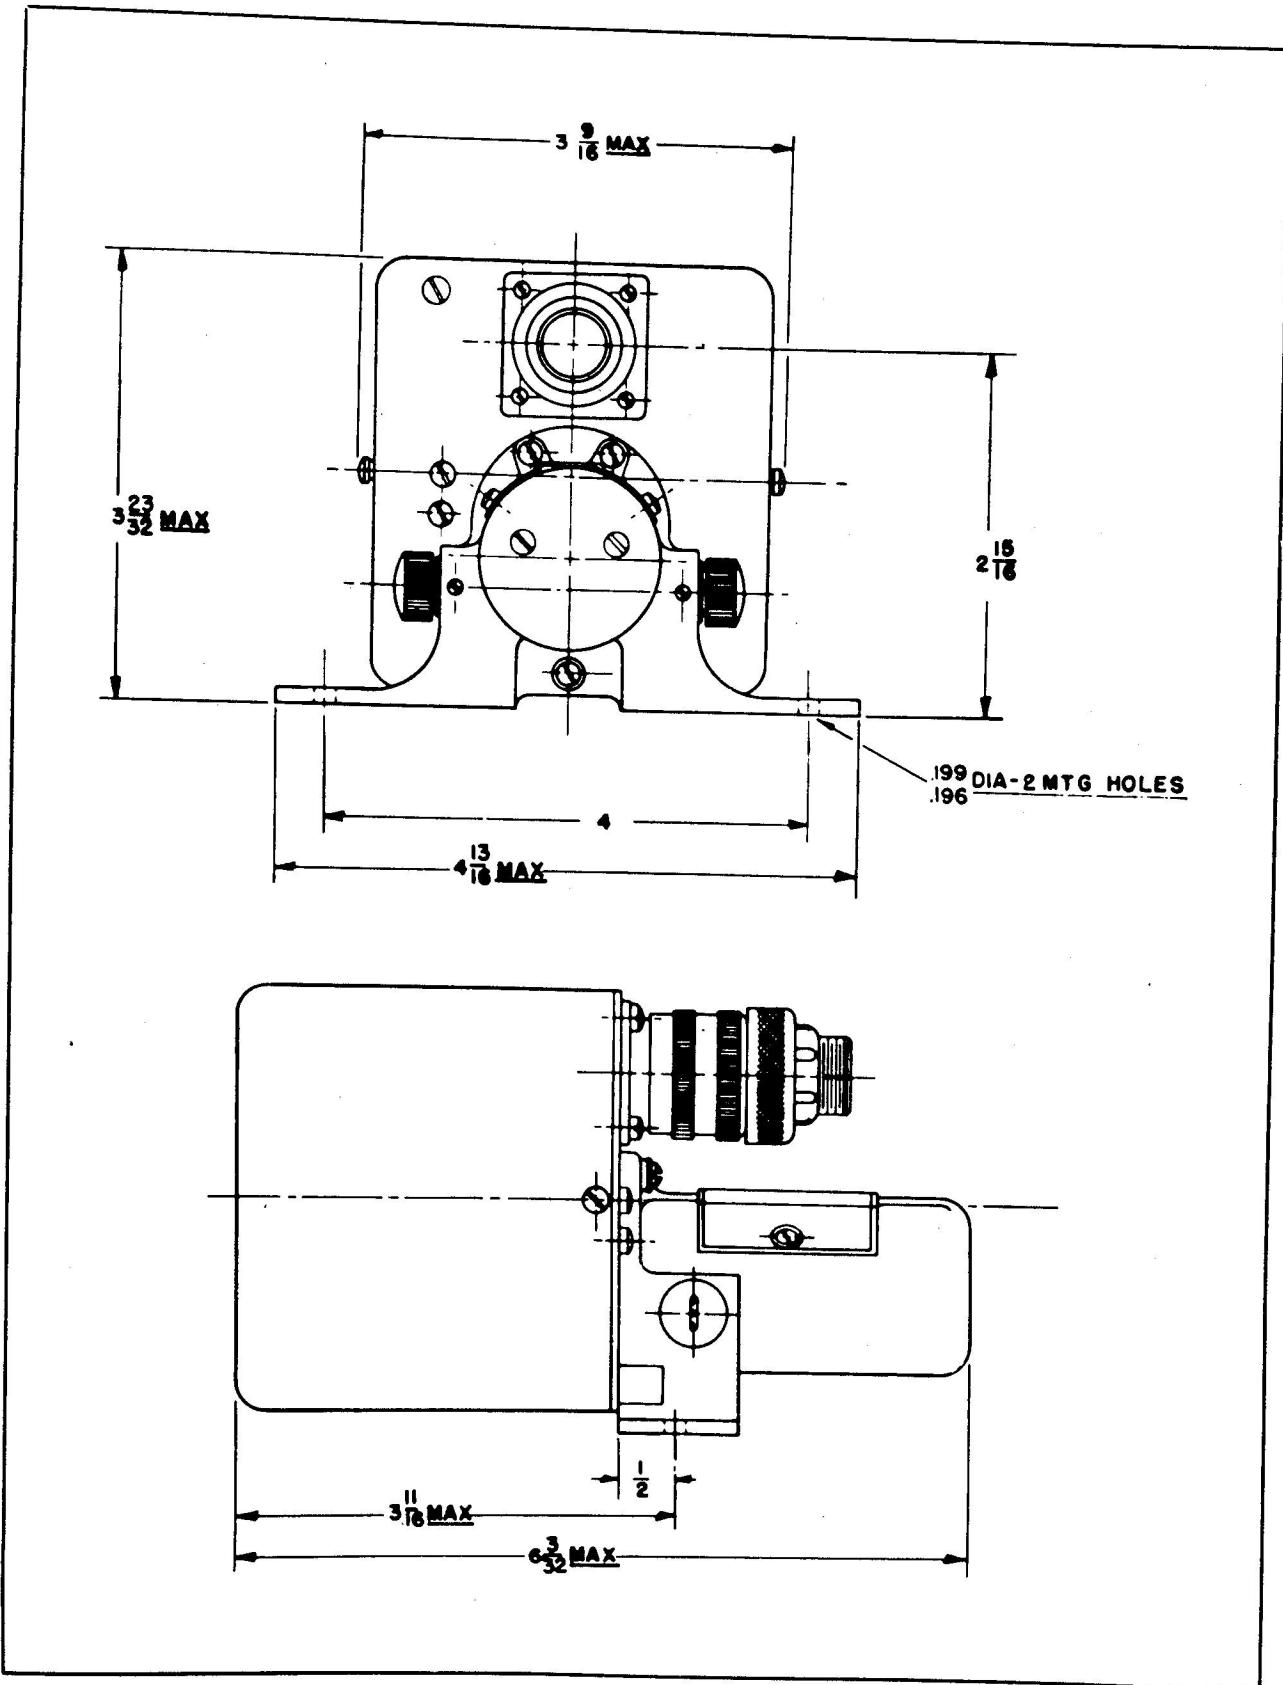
Outlined Dimensional Drawing - Position Light Flasher
